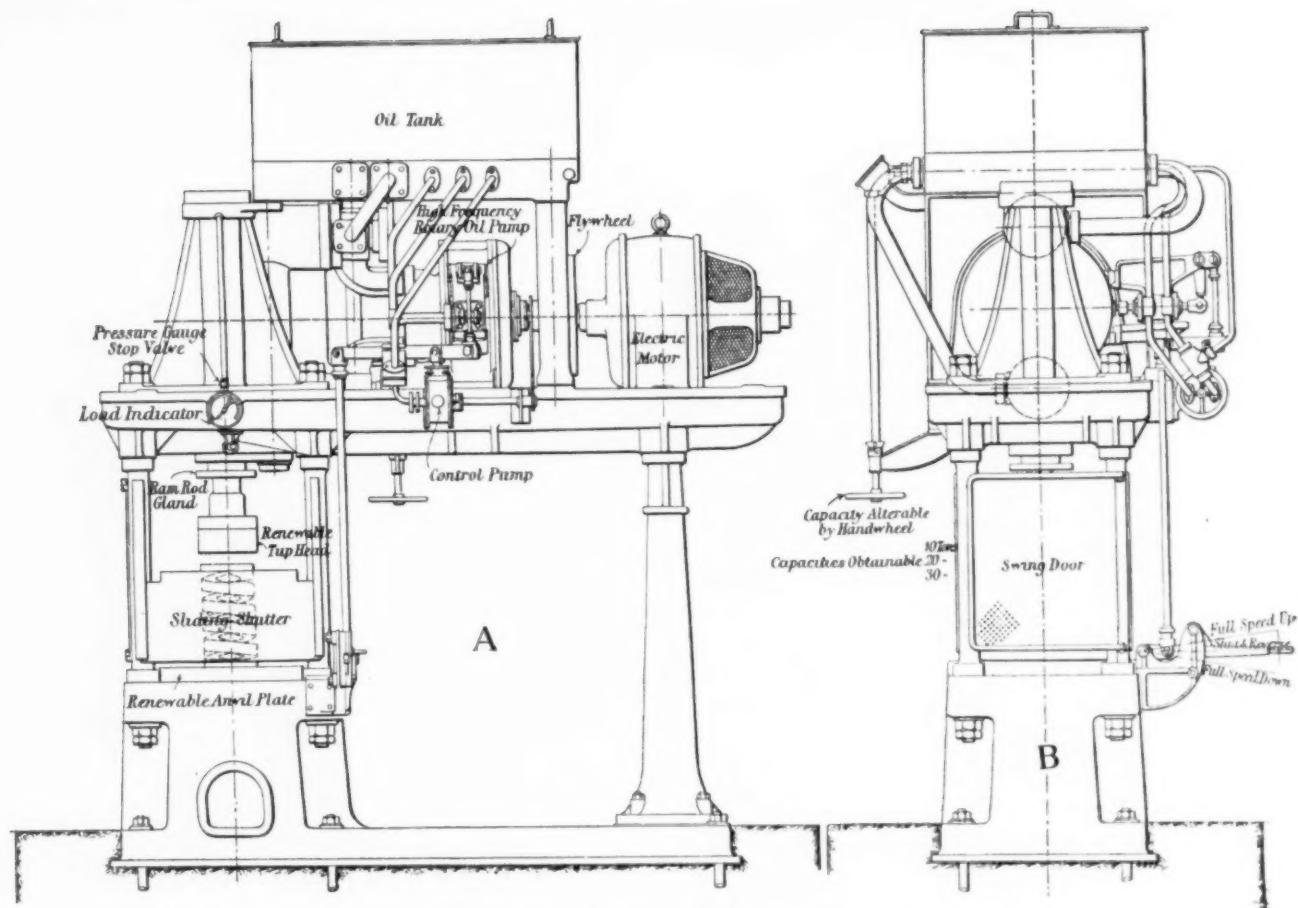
NEW SPRING-SCRAGGING MACHINE OPERATING AS A PRESS
